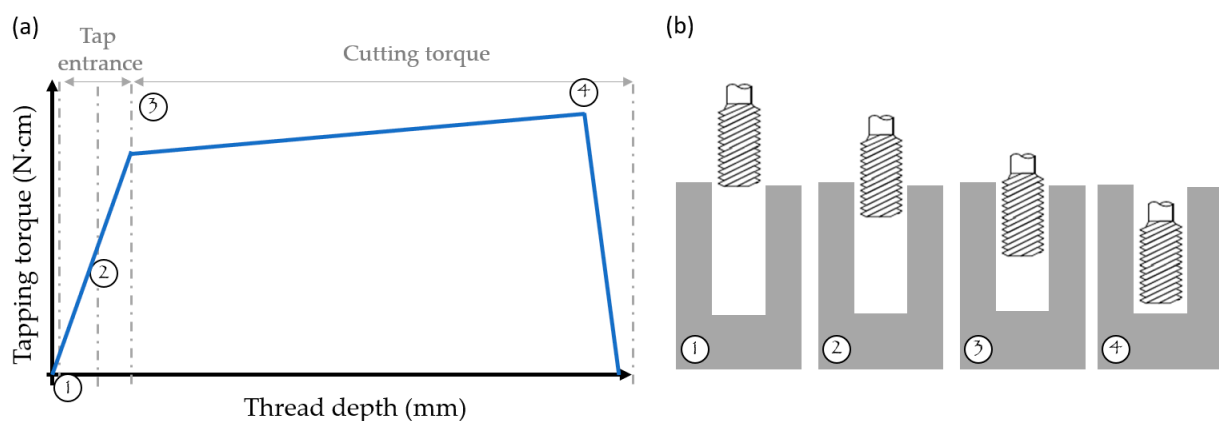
The tapping process: (a) graphical measurement of the tapping torque, (b) different positions of the tap during processing. (1) beginning of the cut, (2) tool penetrating the workpiece, (3) complete chamber teeth and (4) beginning of the reversal of the spindle.
